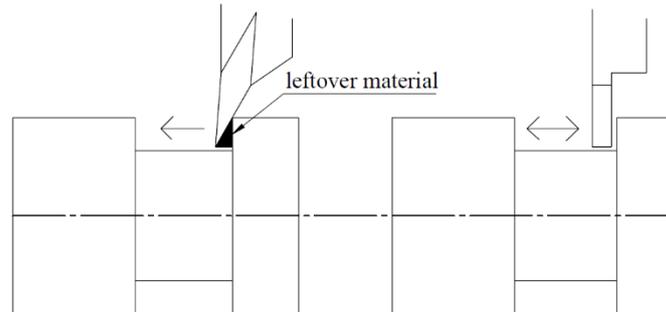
Machining comparison with a turning tool and a left-hand tool.
